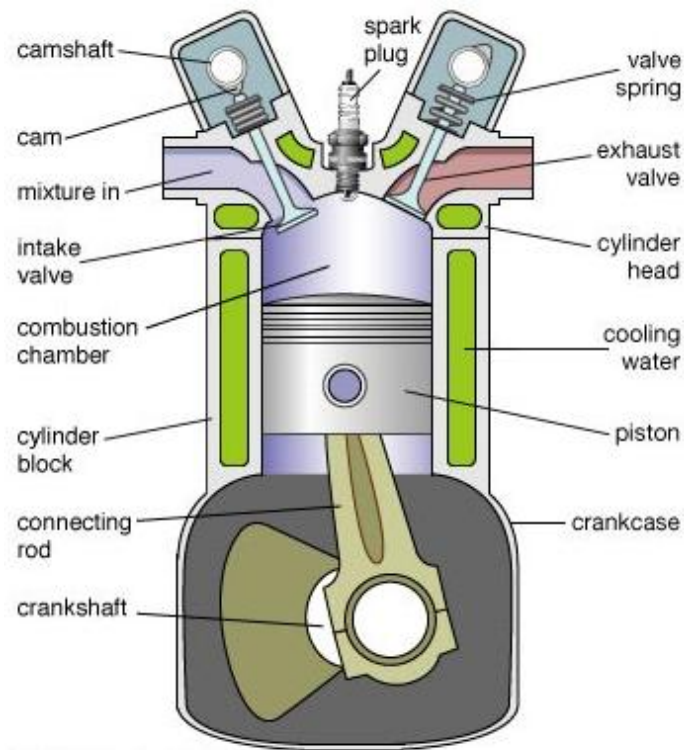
Cross Section Showing One Cylinder of a Four-stroke Internal Combustion Engine.¹³
